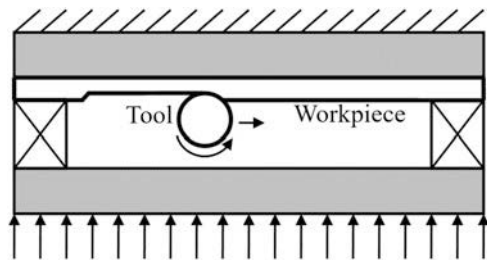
Schematic, illustrating the clamping of the workpiece during the machining process.
